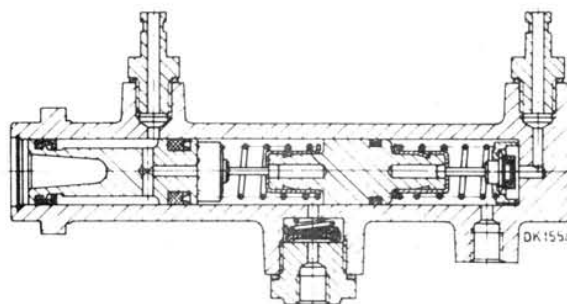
/1 - Sectional View of Brake Master Cylinder
